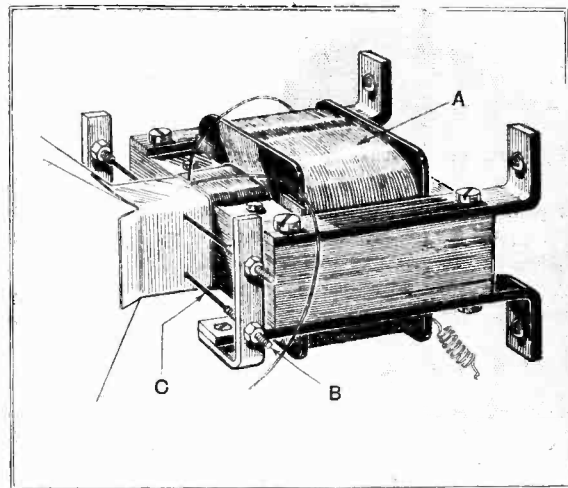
Details of the moving coil system. A, field magnet winding; B, adjusting screws for string tension; C, horizontal supporting strings.
